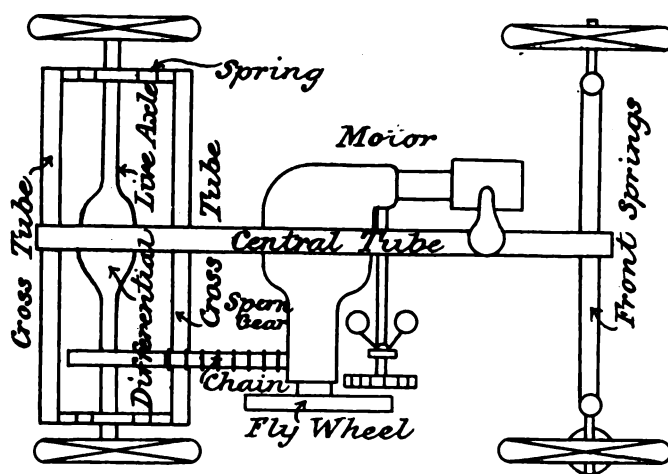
DIAGRAMMATIC PLAN OF BOLLÉE CAR.
